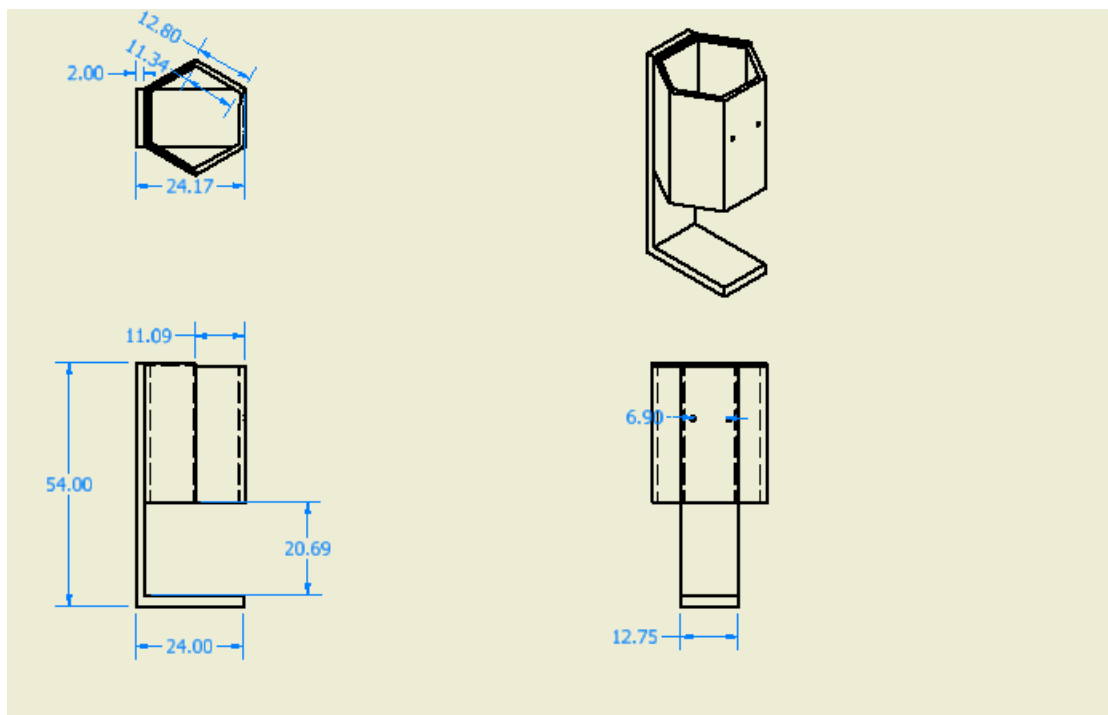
Engineering Drawing of the outer casing of the pill dispenser as well as the stand that held up the structure
